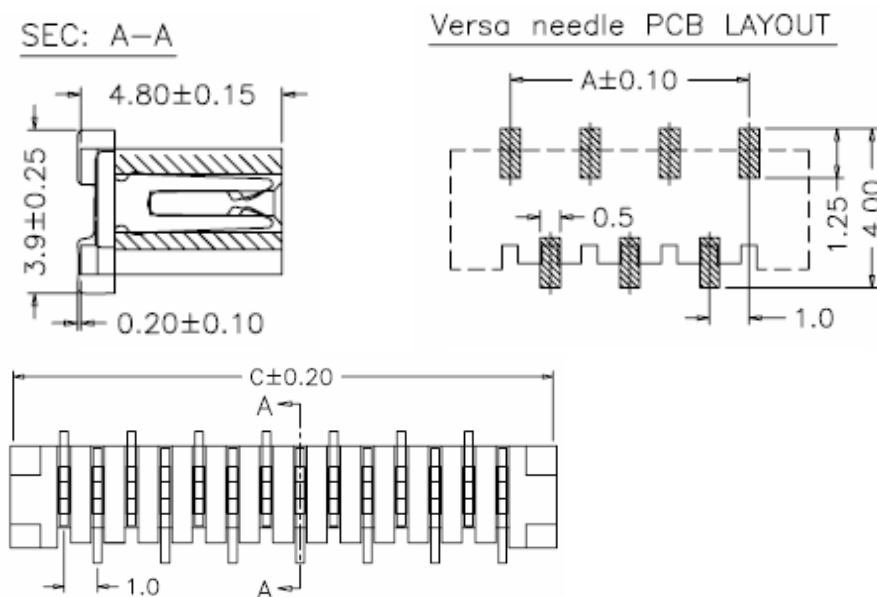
PCB flex connector FPC1.0mm (company: Atom®) dimensions
